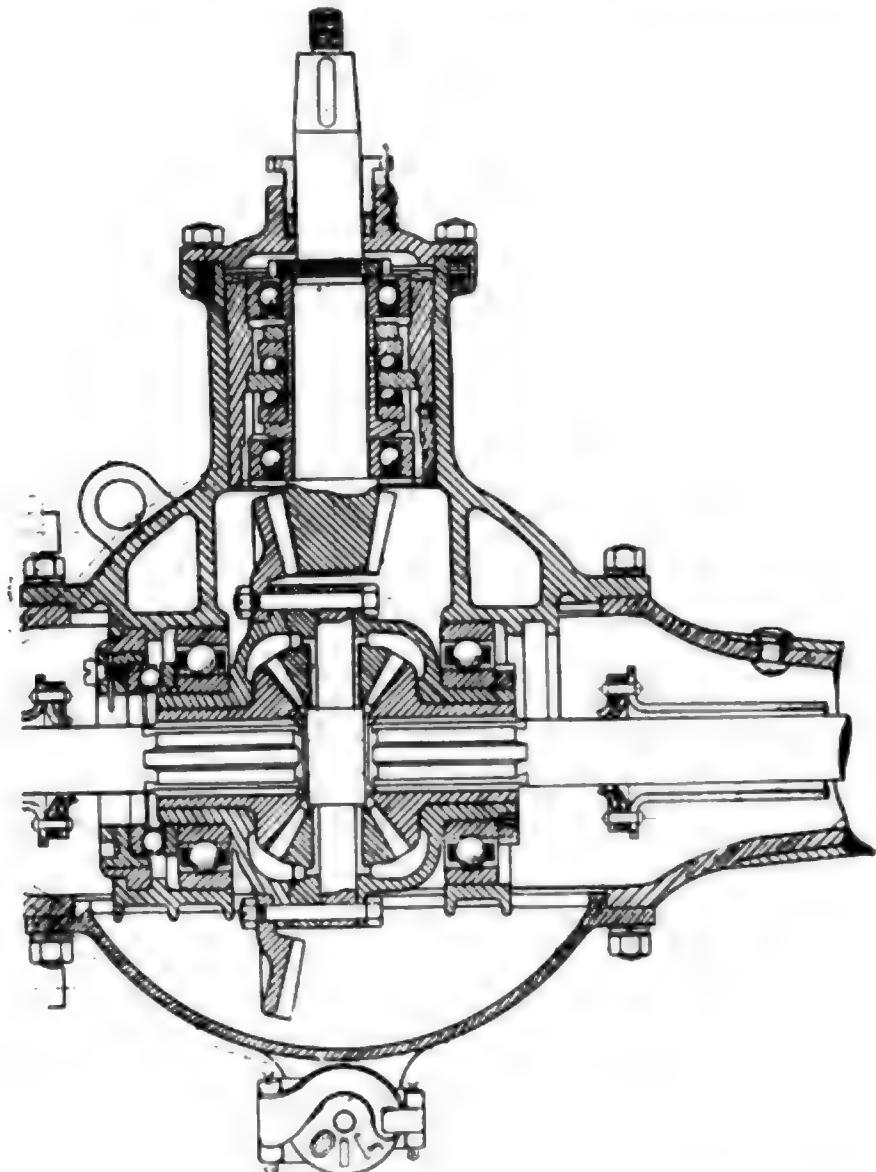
DIFFERENTIAL GEAR ARRANGEMENT. BY MESSRS. E. G. WRIGLEY AND CO., LTD., OF BIRMINGHAM.
